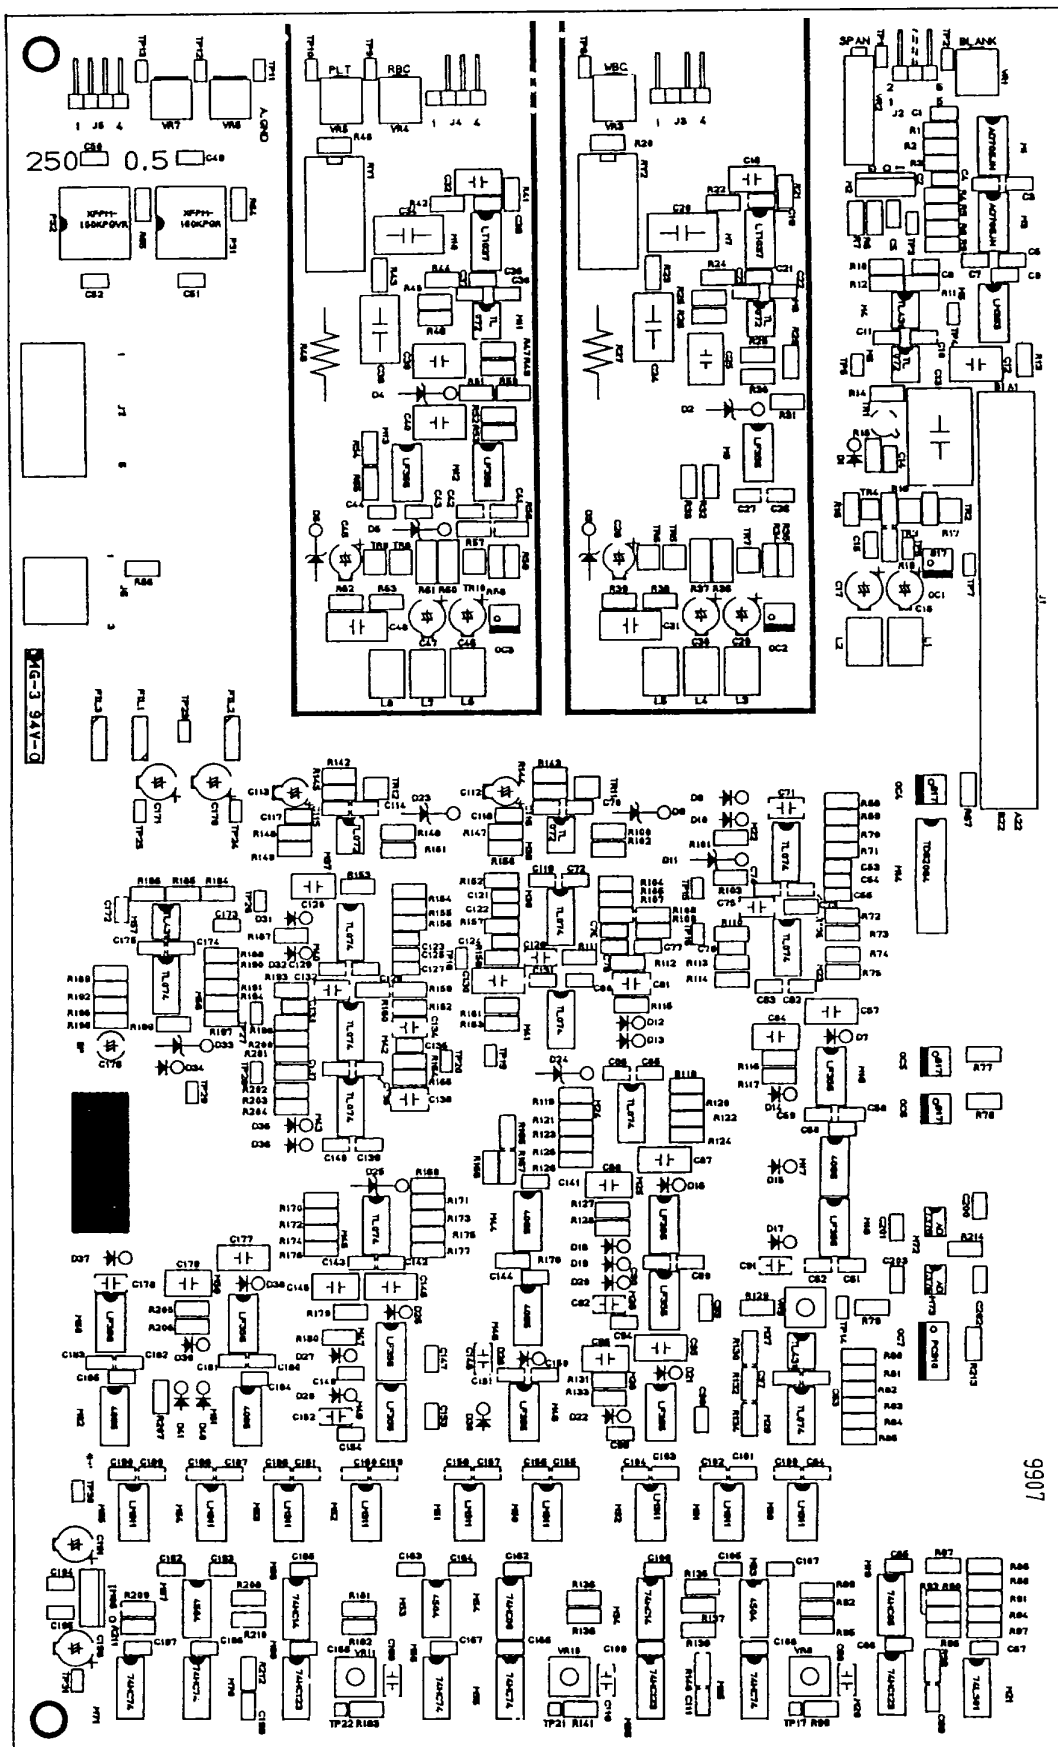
PCB No. 2150 Assembly Drawing (KX-21N) [3]
